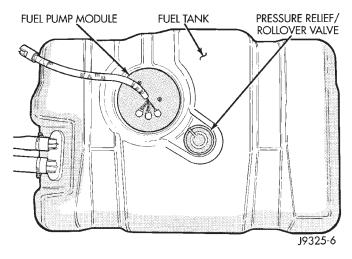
Pressure Relief/Rollover Valve Location REMOVAL
